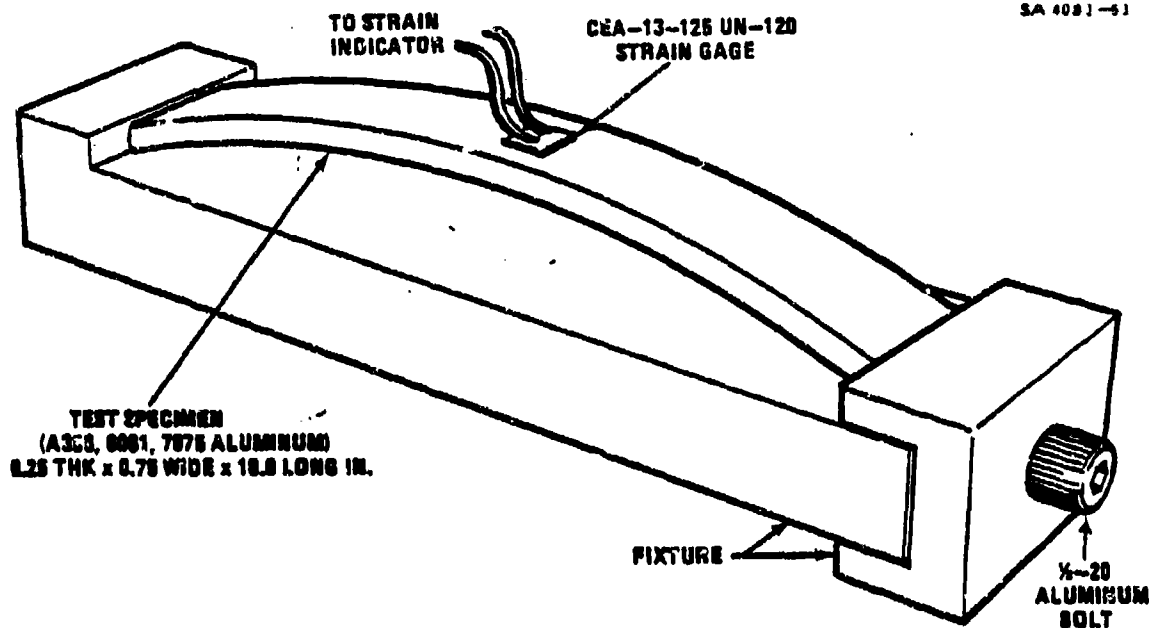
Stress Corrosion Test Fixture With Specimen Installed
